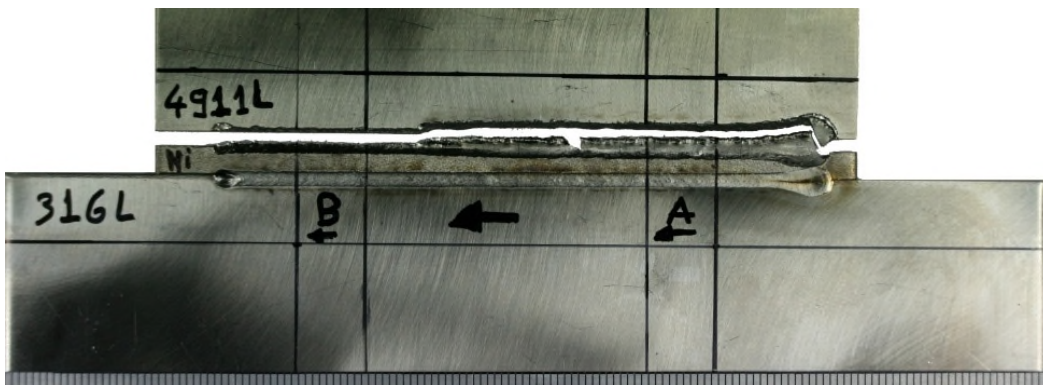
Thick Ni interlayer sample on stainless steel to titanium welding keyhole laser welding.
